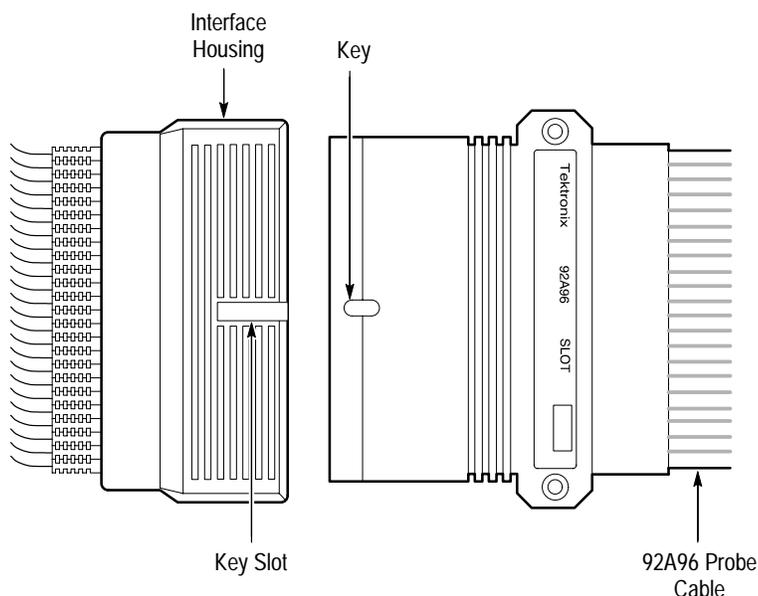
Connecting the Interface Housing to the 92A96 Probe Cable
